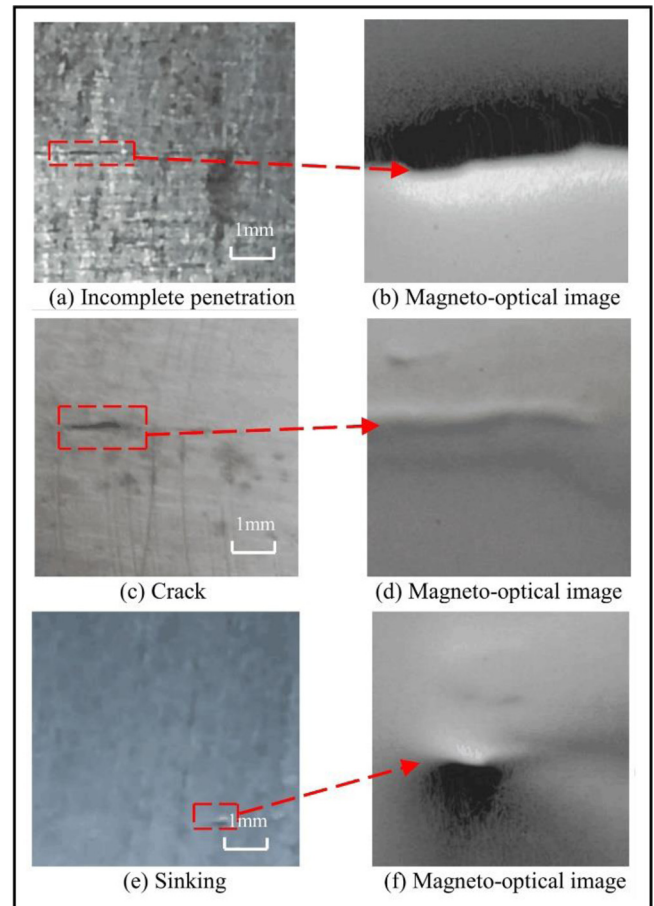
Weld defects such as incomplete penetration, crack, and sinking were detected by MOI. [247].
